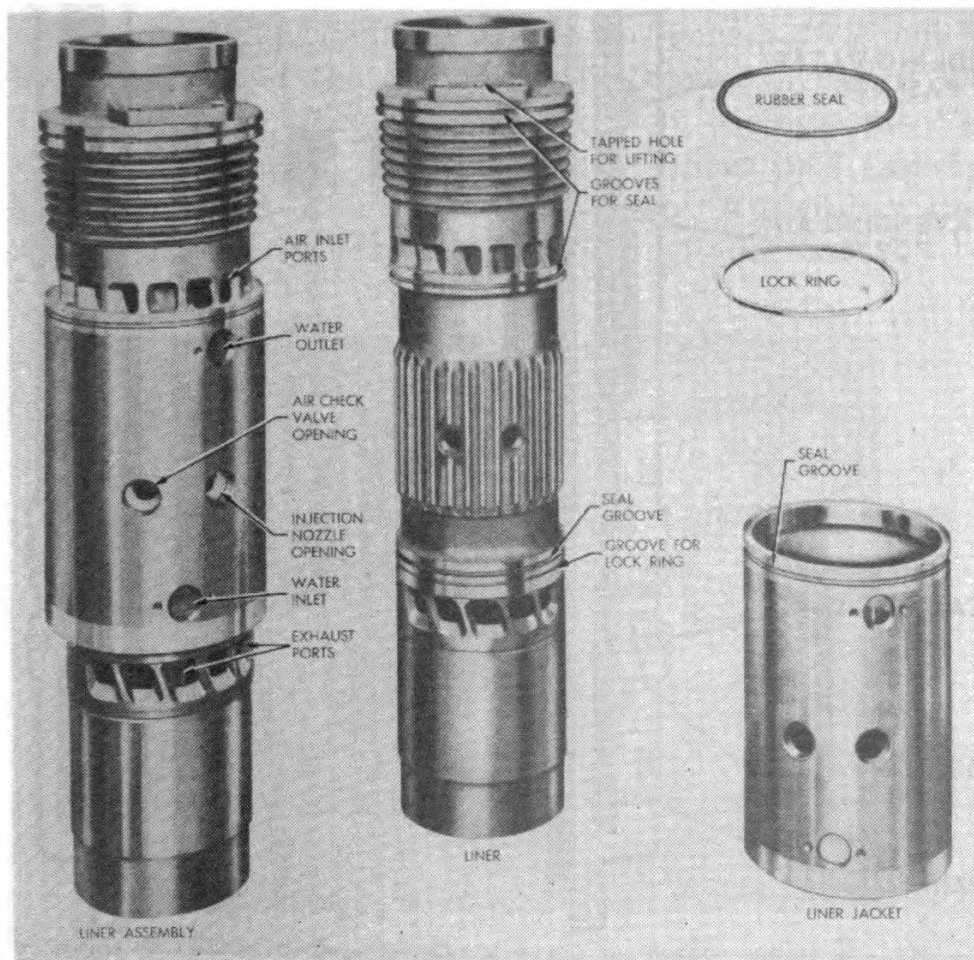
Cylinder liner assembly with sealed-on jacket (FM 38 D 8 1/8).
